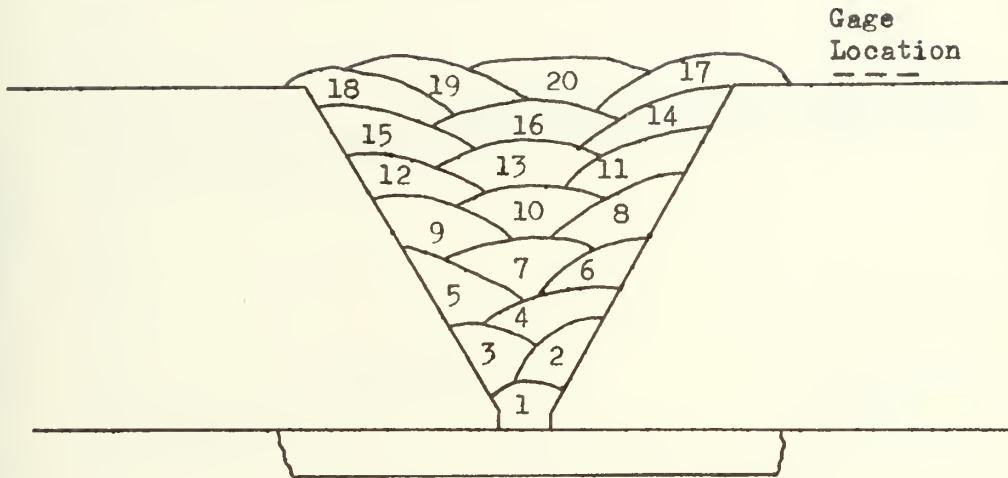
SEQUENCE OF WELD PASSES
